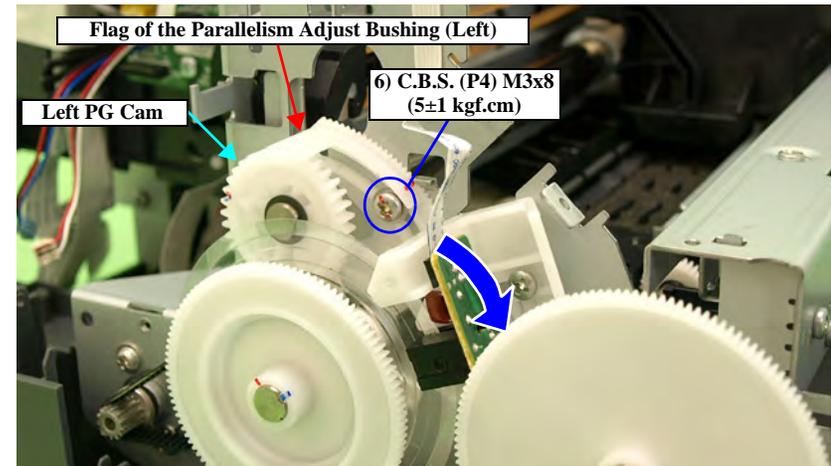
Rotating the Left Parallelism Adjust Bushing
